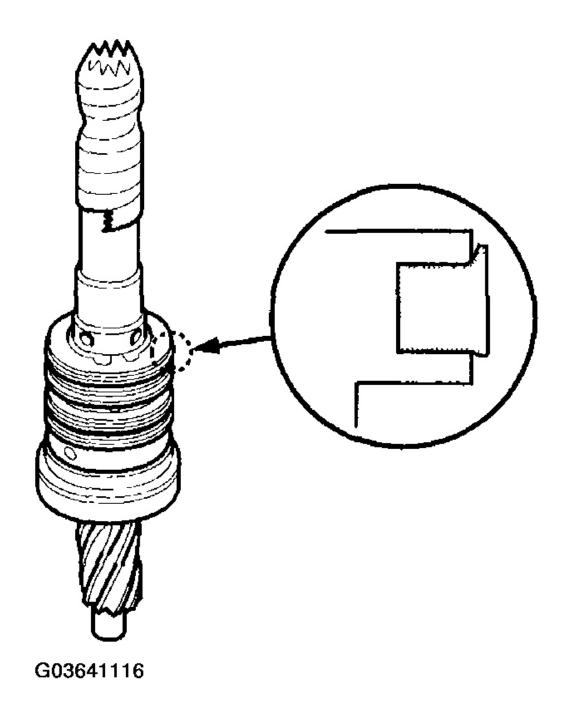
Identifying Edges Of Grooves In Sleeve Courtesy of AMERICAN HONDA MOTOR CO., INC.
